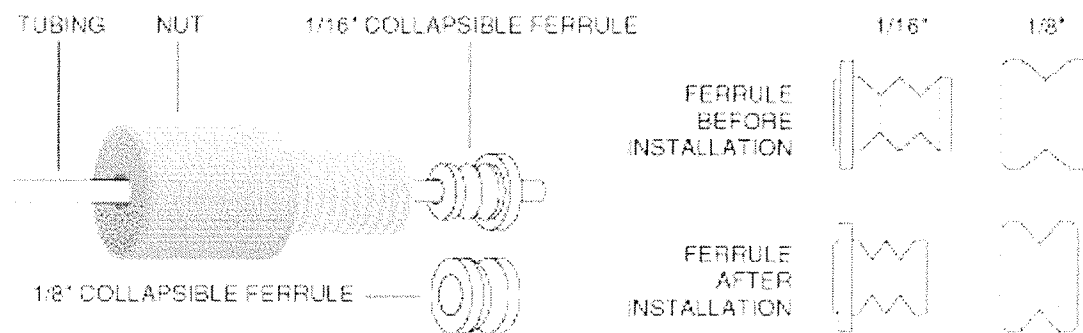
Illustration of Cheminert Flangless Tube Fittings.
